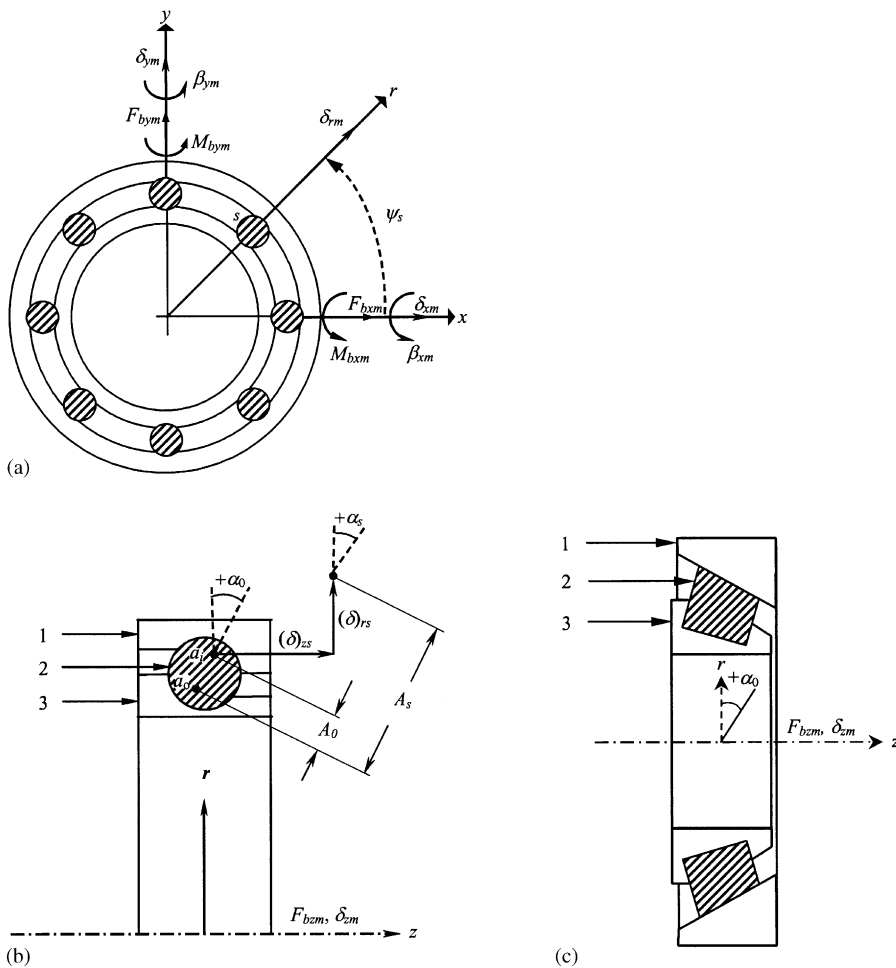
Rolling element bearing kinematics and the corresponding coordinate systems: (a) radial view; (b) axial view of ball bearing; (c) axial view of roller bearing; outer ring (cup), 1; rolling element, 2; inner ring (cone), 3.
